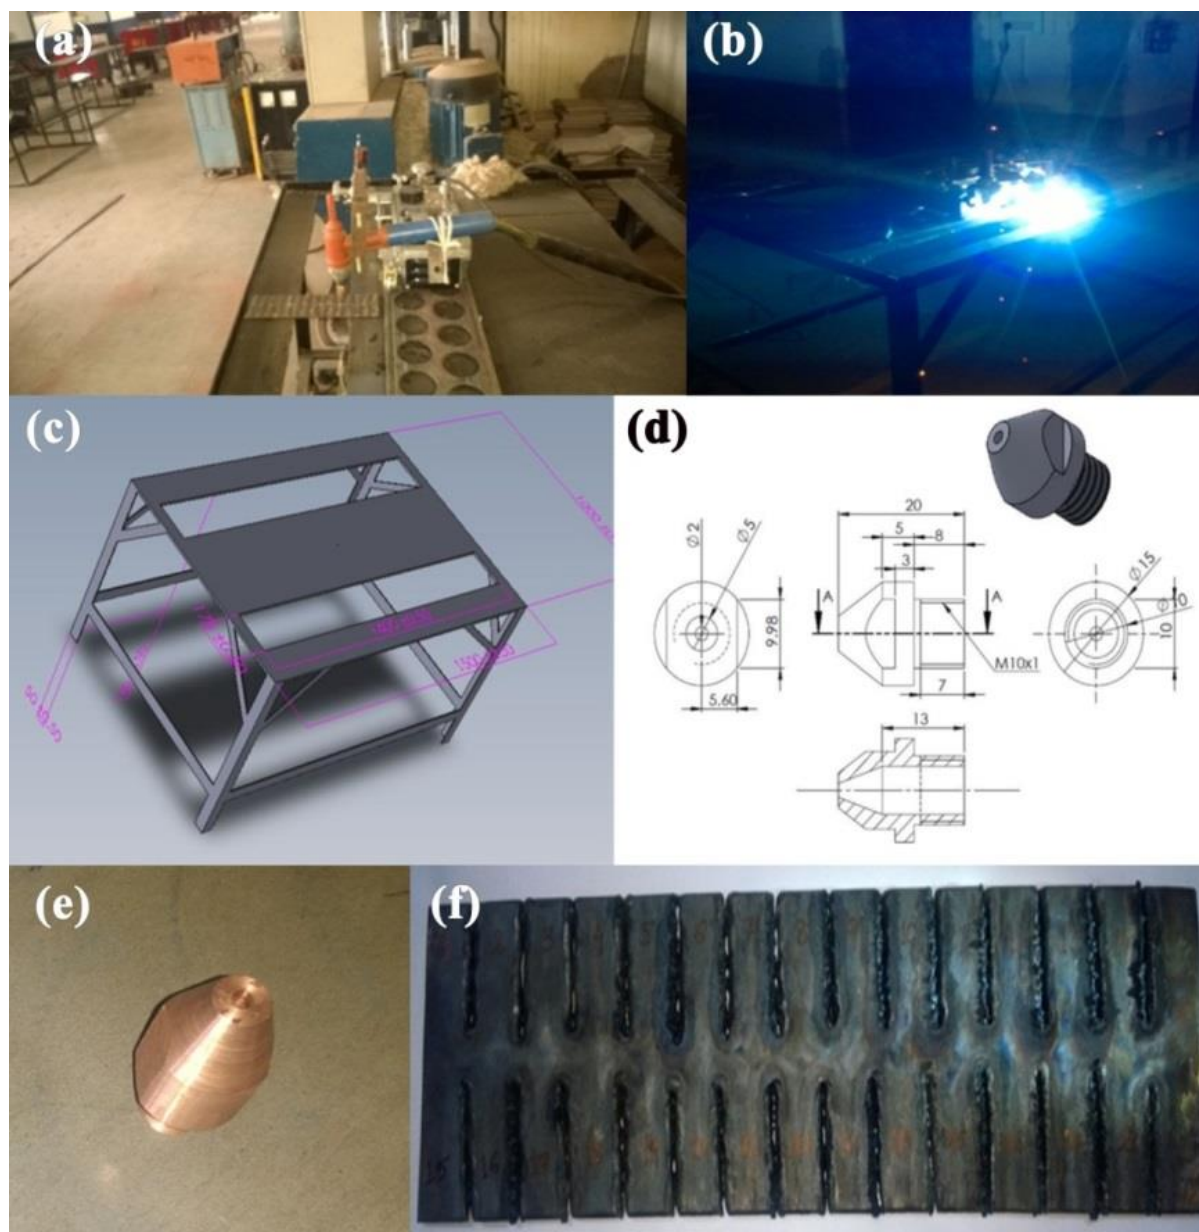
(a) Experimental set-up for plasma arc cutting system, (b) During plasma arc cutting operation, (c) Schematic diagram of used table for cutting process, (d) Schematic diagram of used nozzle for cutting process, (e) Brass nozzle used in plasma cutting and (f) Work piece of AISI 304 steel after cut
